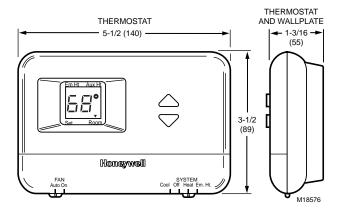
T8411R Thermostat dimensions in in. (mm).
